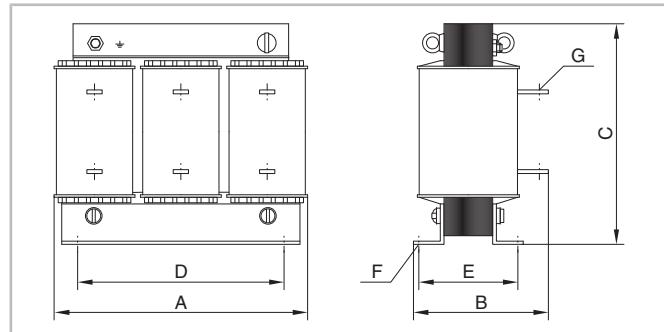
Dimensional drawings of line reactors 400-S .. 600-S
